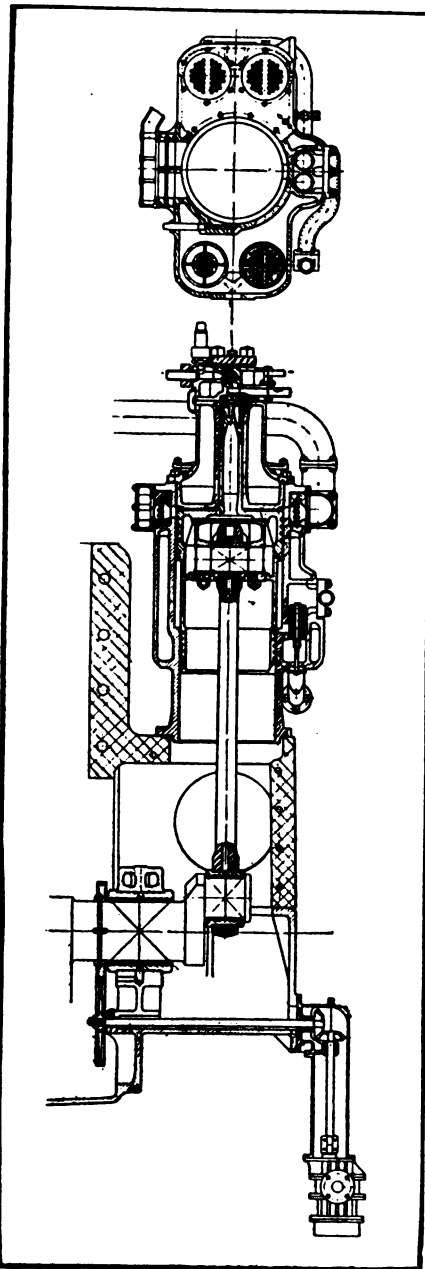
CROSS SECTION THROUGH COMPRESSOR
